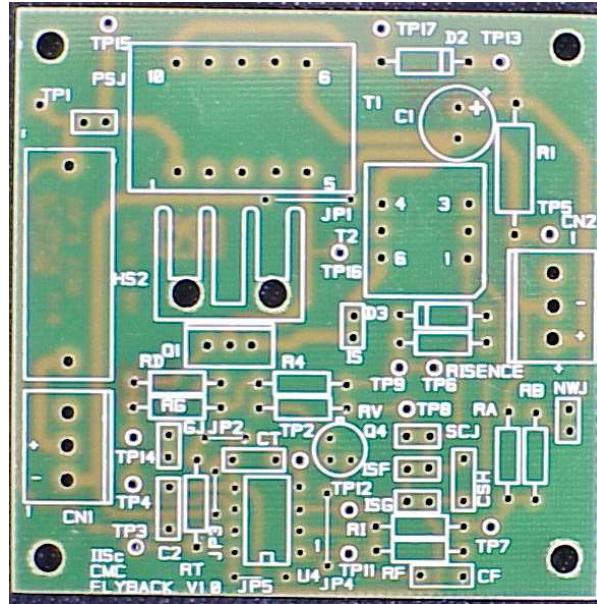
Bare PCB Board of the CMC-flyback Converter
